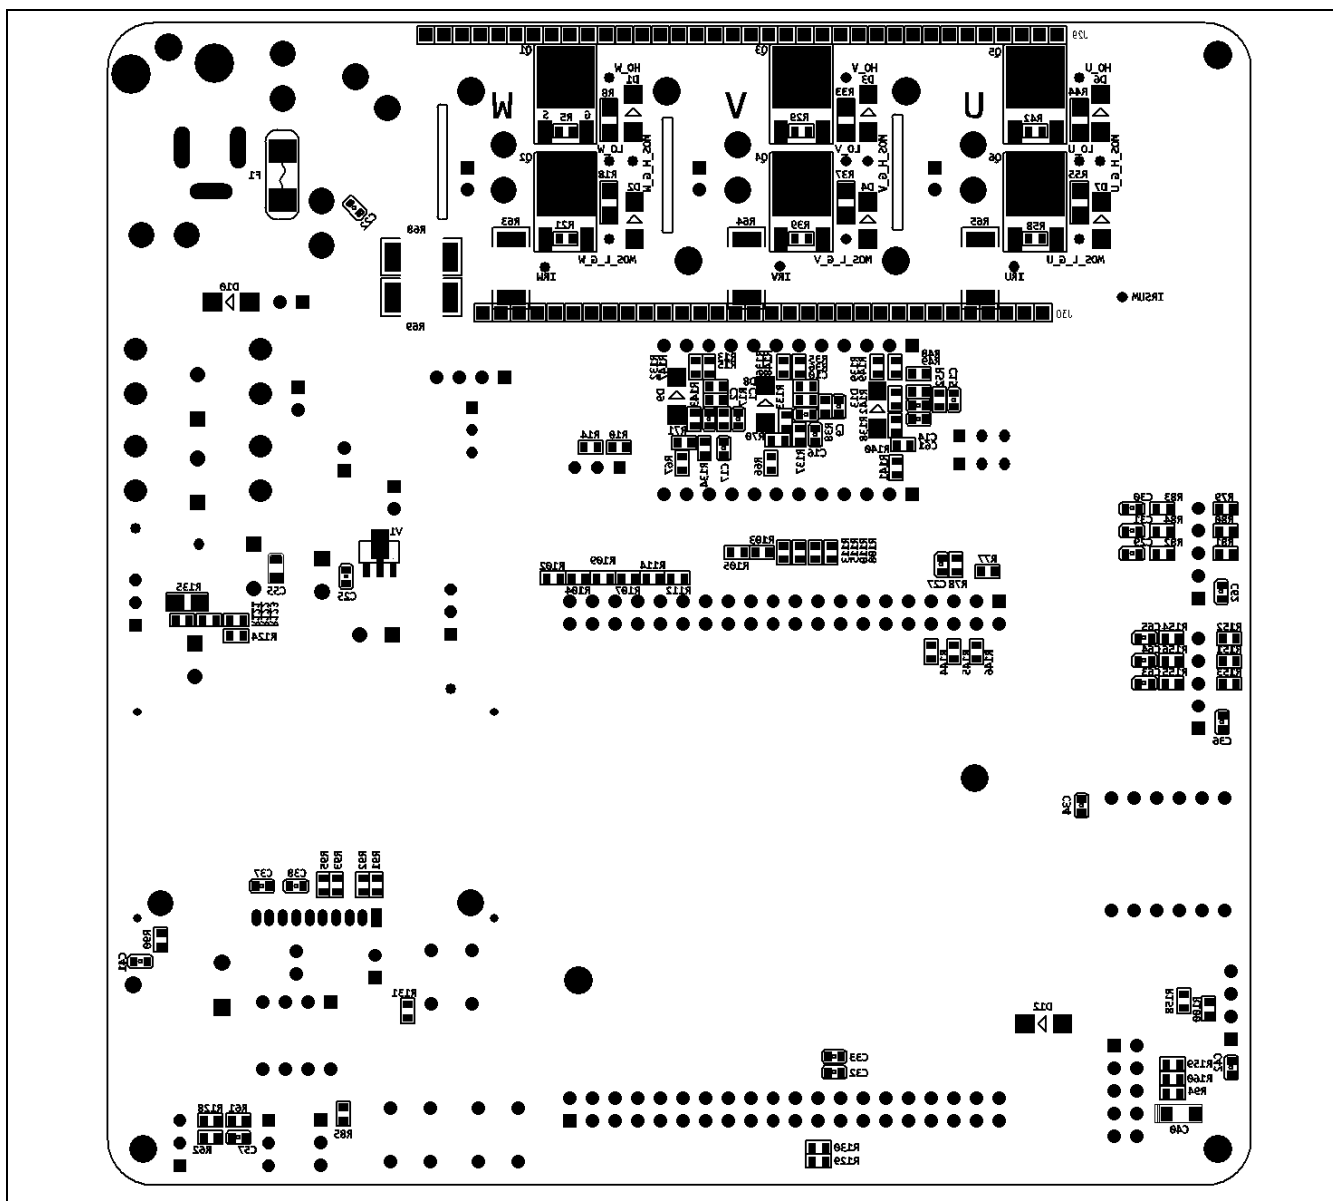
Nu-LVMDM-MOS 2.8 PCB Placement -Bottom
